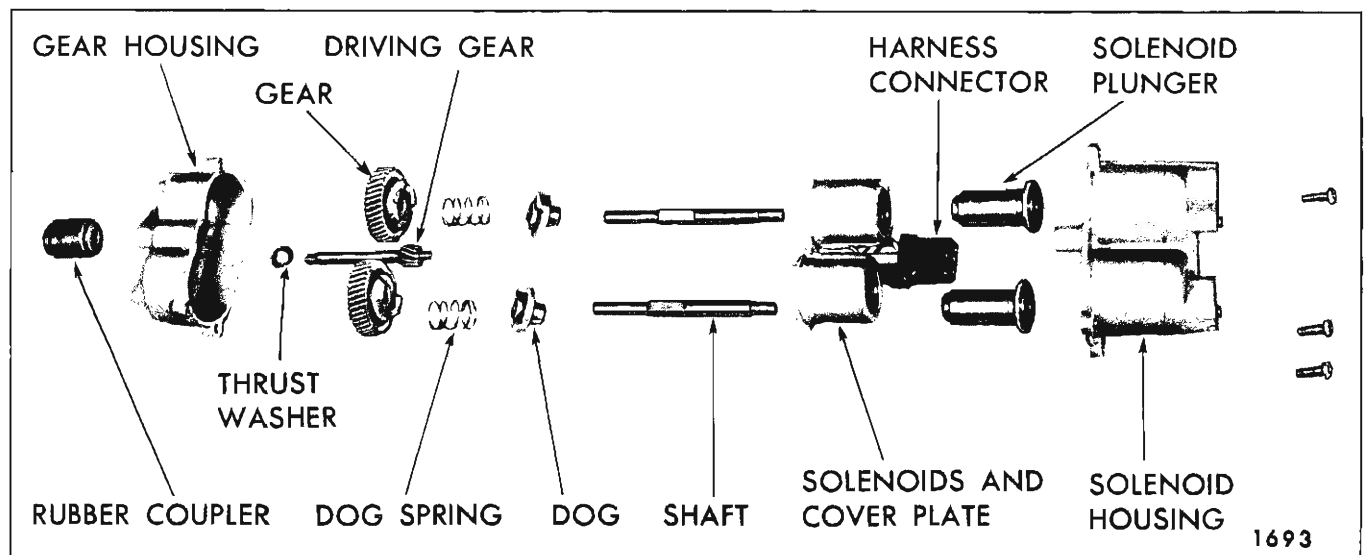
H16—Exploded View of Four-Way Seat Transmission
